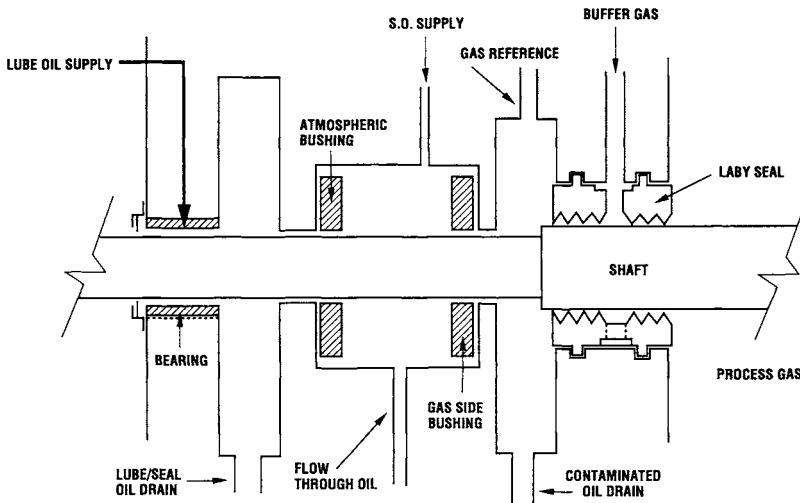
Bushing seal schematic (Courtesy of M.E. Crane Consultant)
